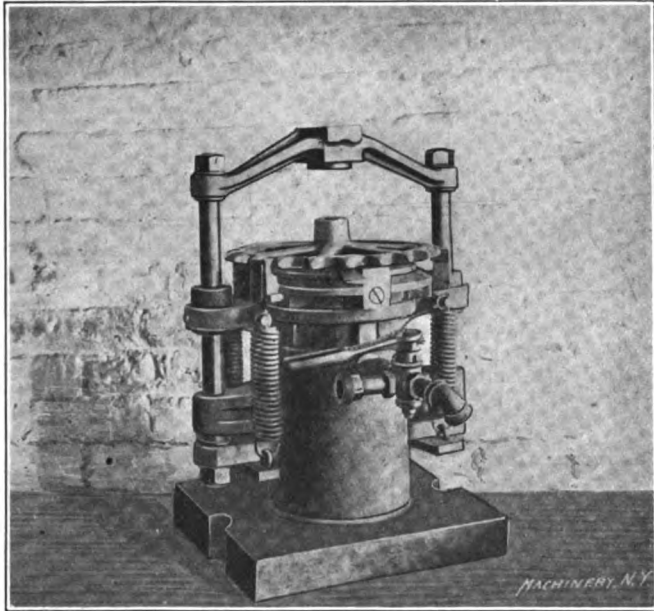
Pneumatic Clamping Jig used for Drilling Sprocket Wheel.
